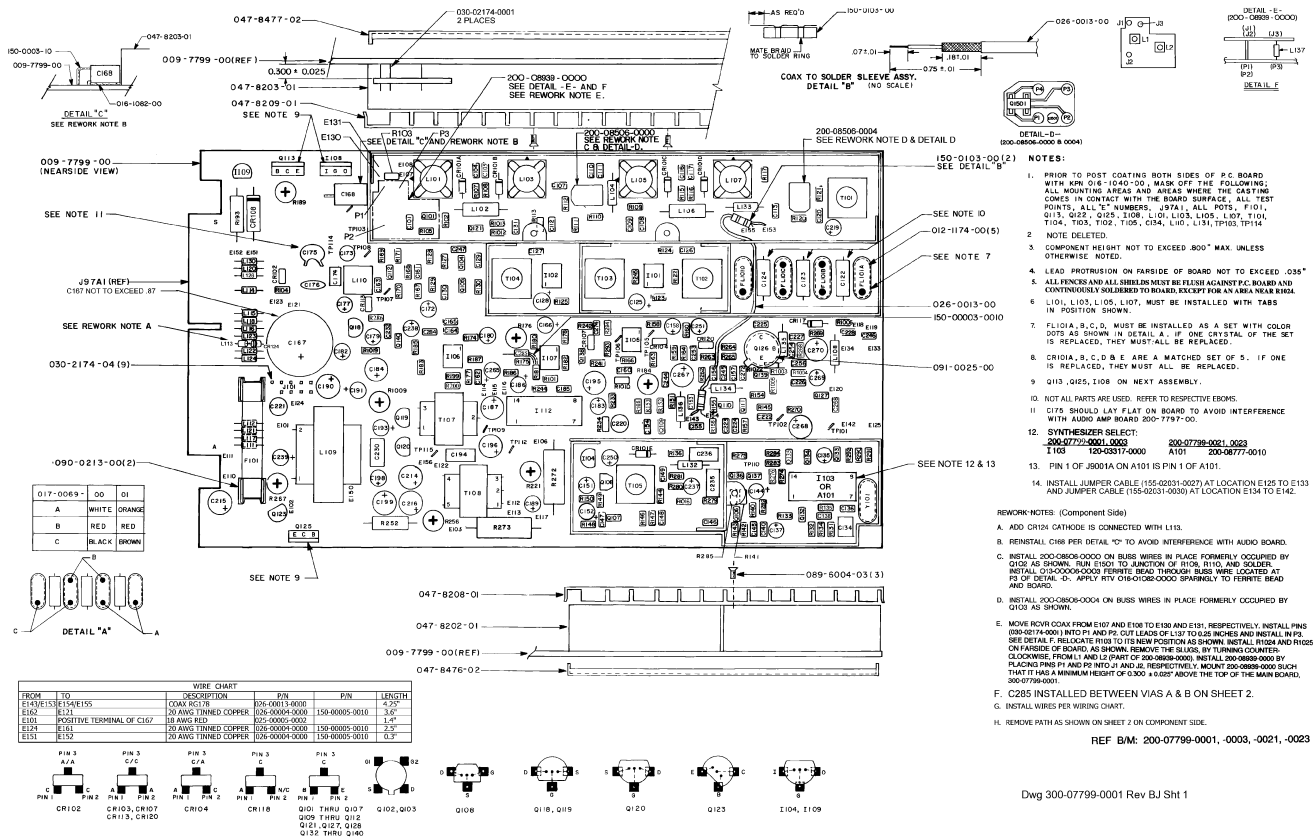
KY 96A (28V) Main Board Assembly (Sht 1 of 2)
